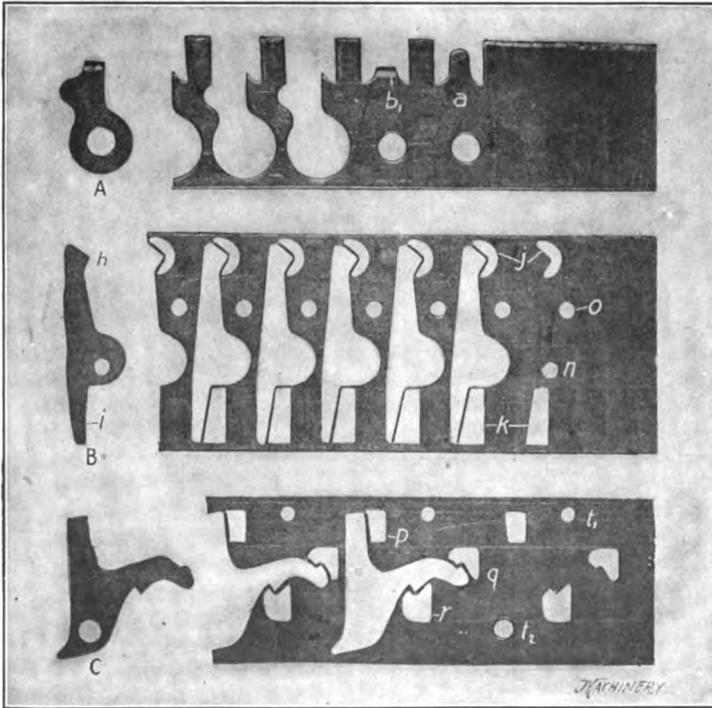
Blanked Parts and Scrap, Illustrating Successive Operations
